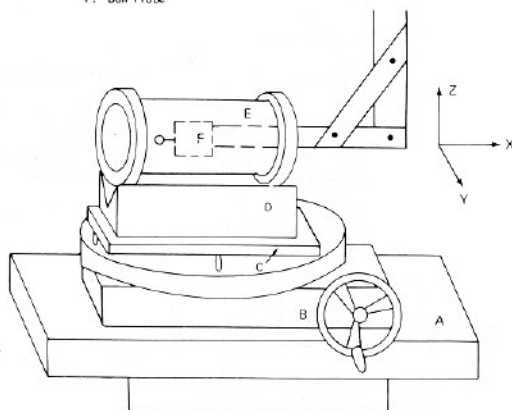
Schematic diagram of parabola on test mount. Machine axes are indicated: (a) parabola; (b) hyperbola.
